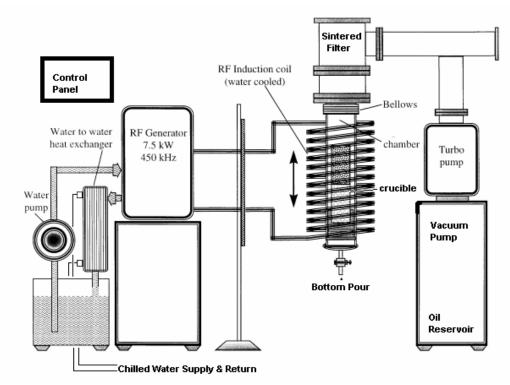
INDUCTION HEATING FURNACE SCHEMATIC
